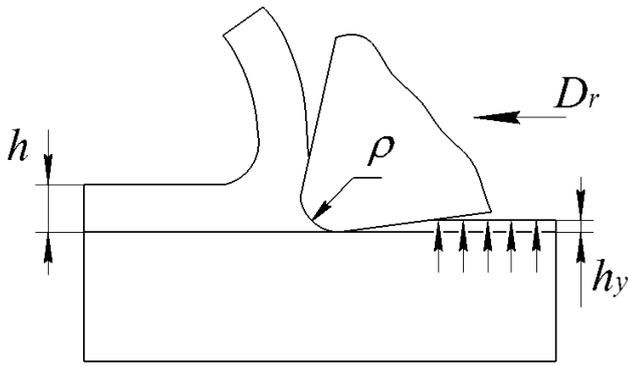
The diagram for removing a layer of the material when machining with a blade tool
